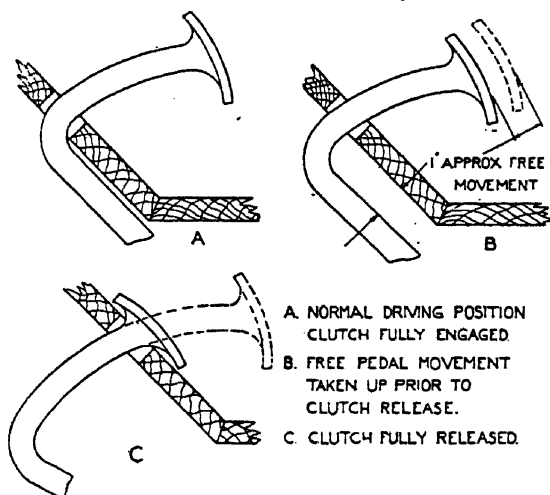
Illustrating Method of Adjusting Clutch Pedal Position.
